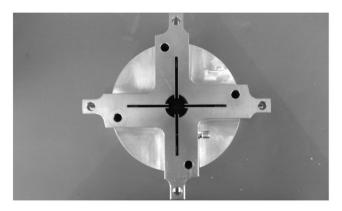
Spark-eroded and machine disk element of a prototype channellised waveguide feed.
